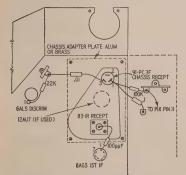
The adapter plate and connections to the 630 type receiver chassis.
